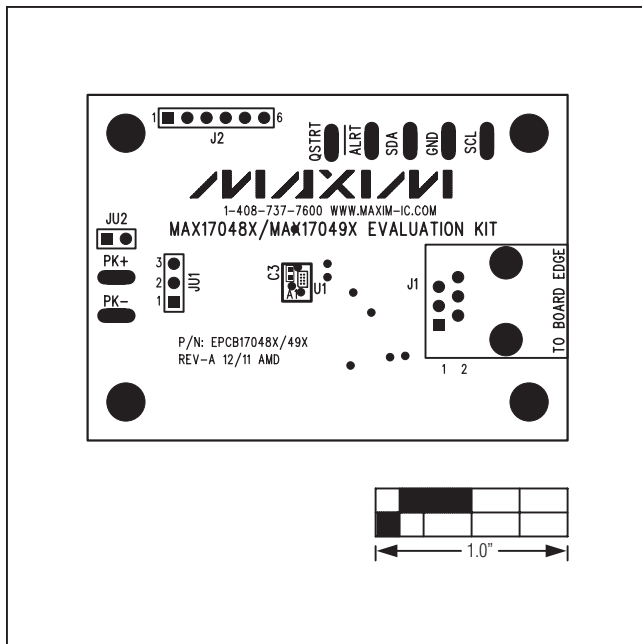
MAX17048X/MAX17049X EV Kits PCB Layout—Component Side
